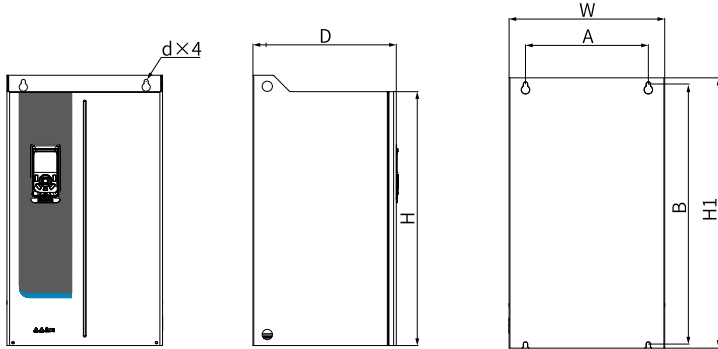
Outline dimensions and mounting dimensions of S8 to S9 models
